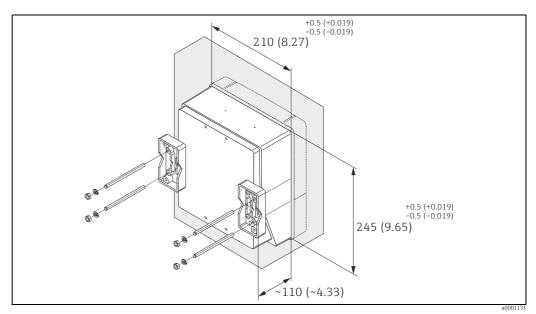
Panel installation (wall-mount housing). Engineering unit mm (inch)
